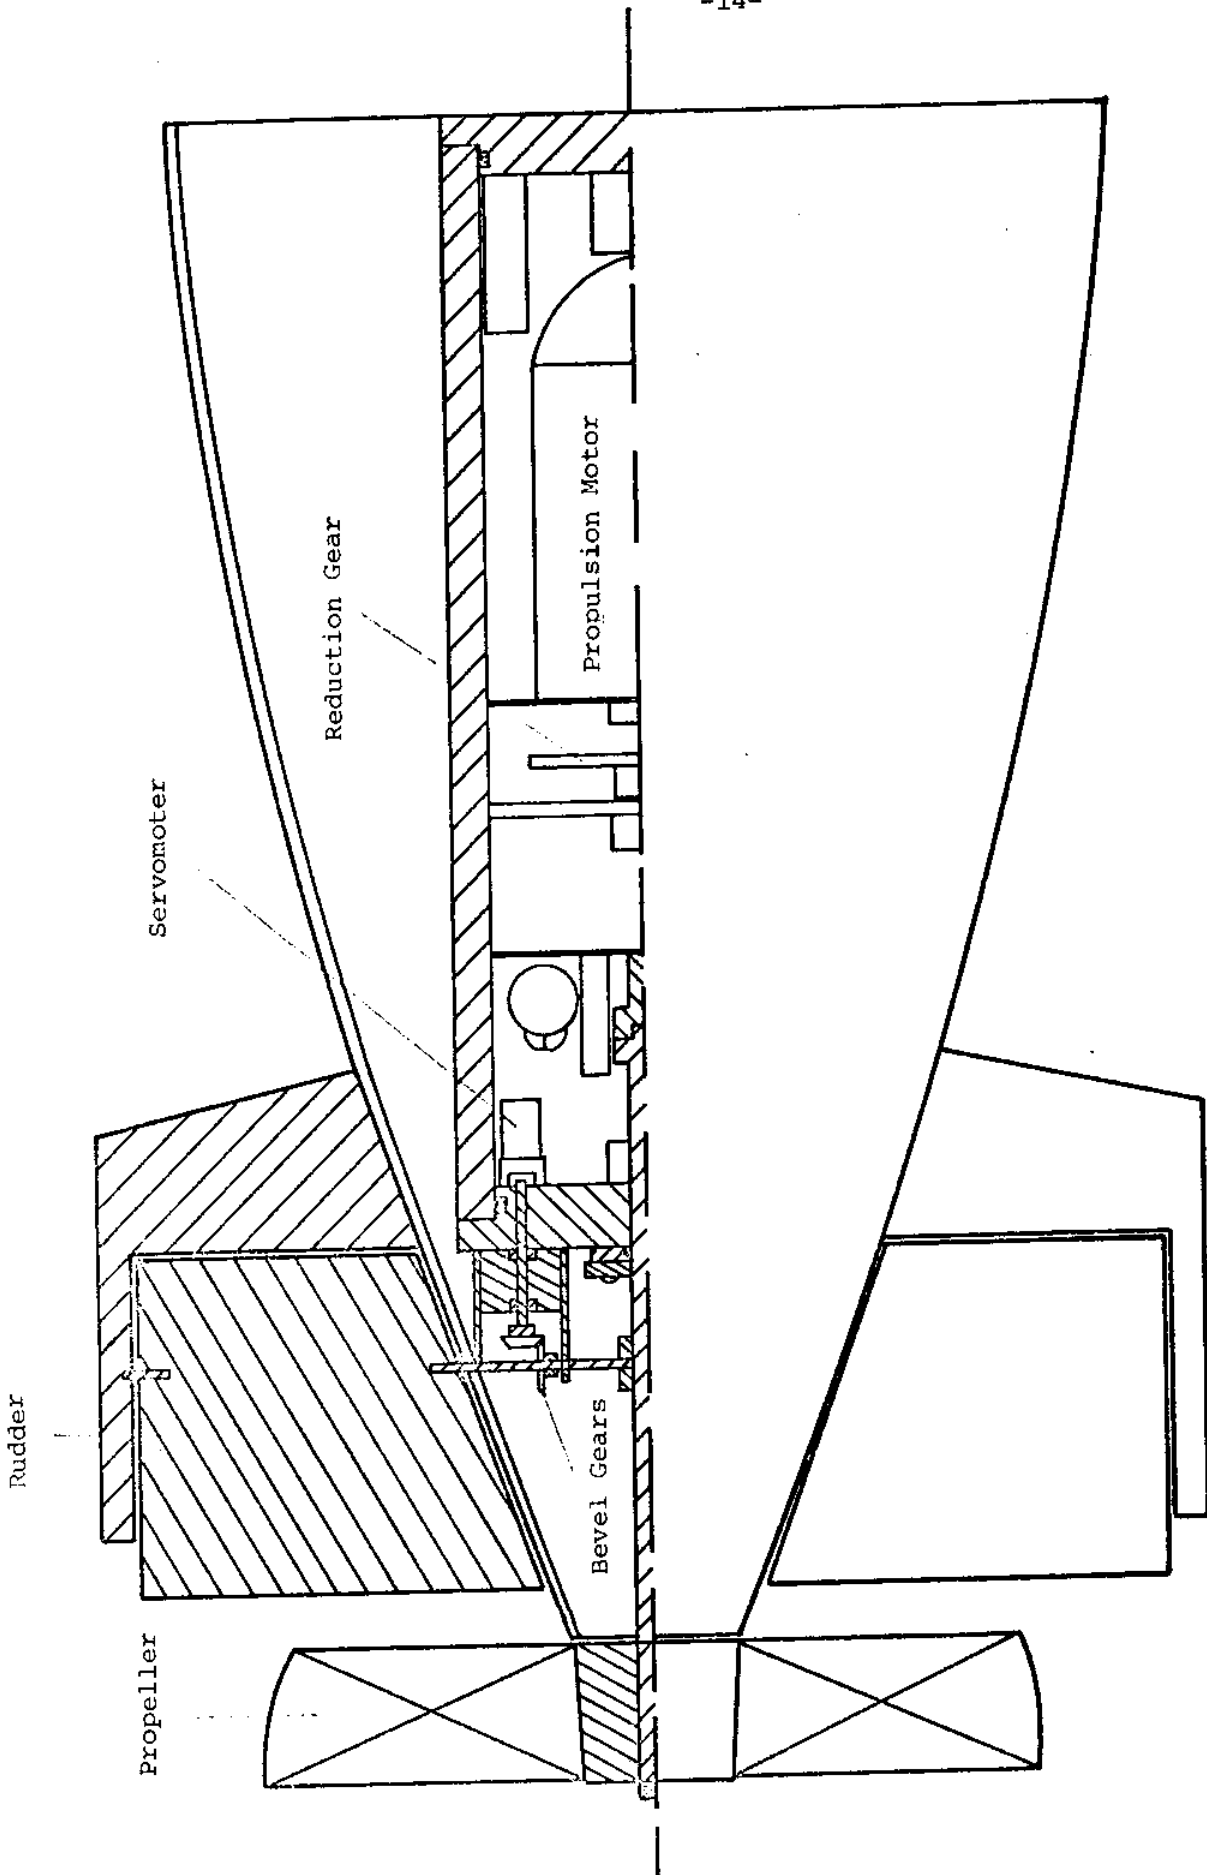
The Motor Tube and Stern Control Surfaces
